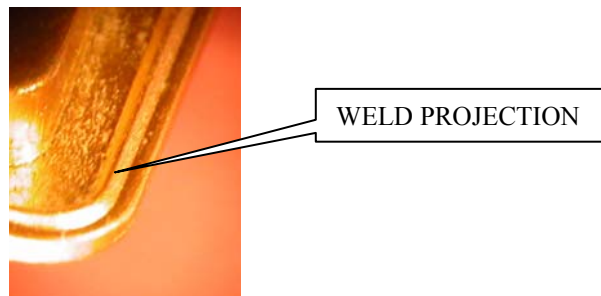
Critical seal area of a projection-weld package
